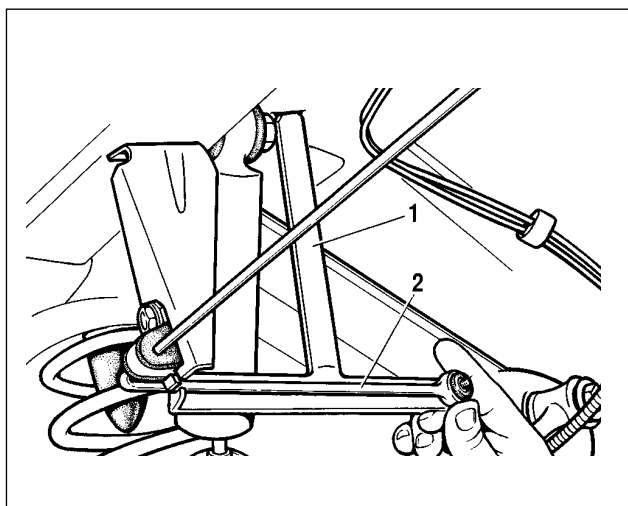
Installing tool 67.7820.9519 to adjust the position of the rear brake pressure regulator:
